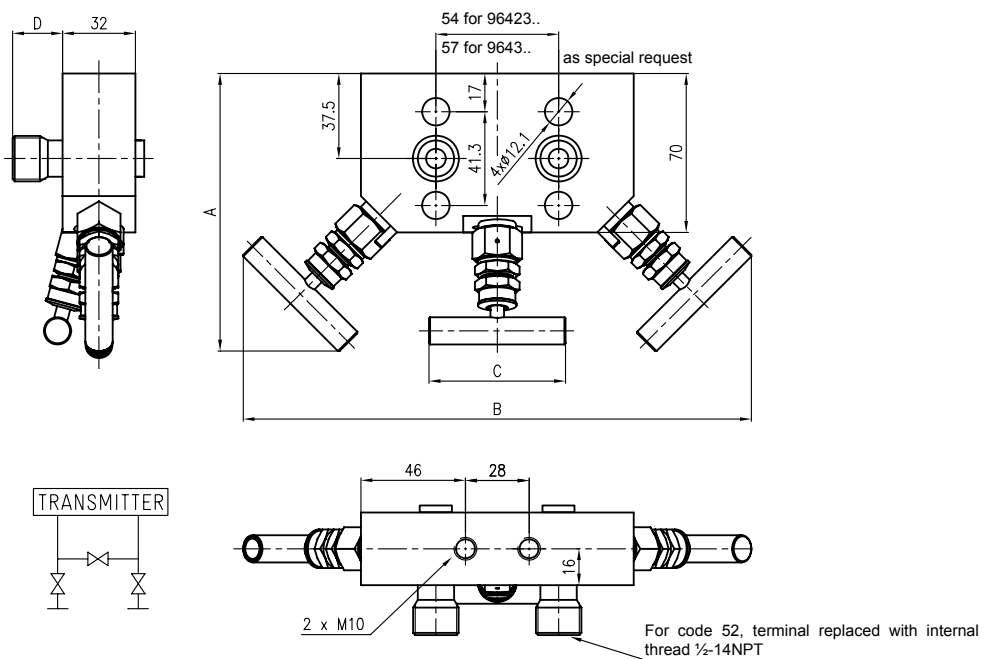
Two-way valve set (964 41..), dimensional drawing, scheme
